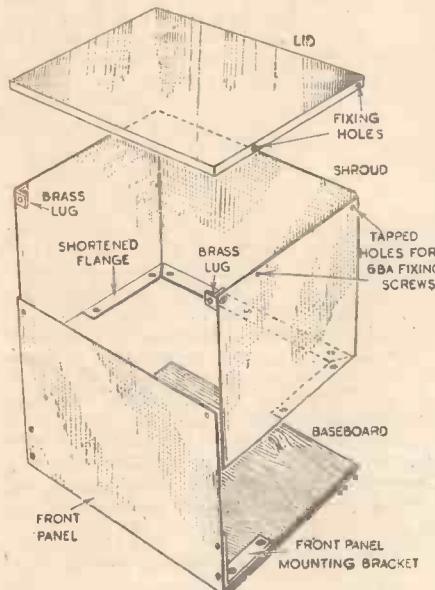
Details of the baseboard, panel, and screen-casing assembly.
